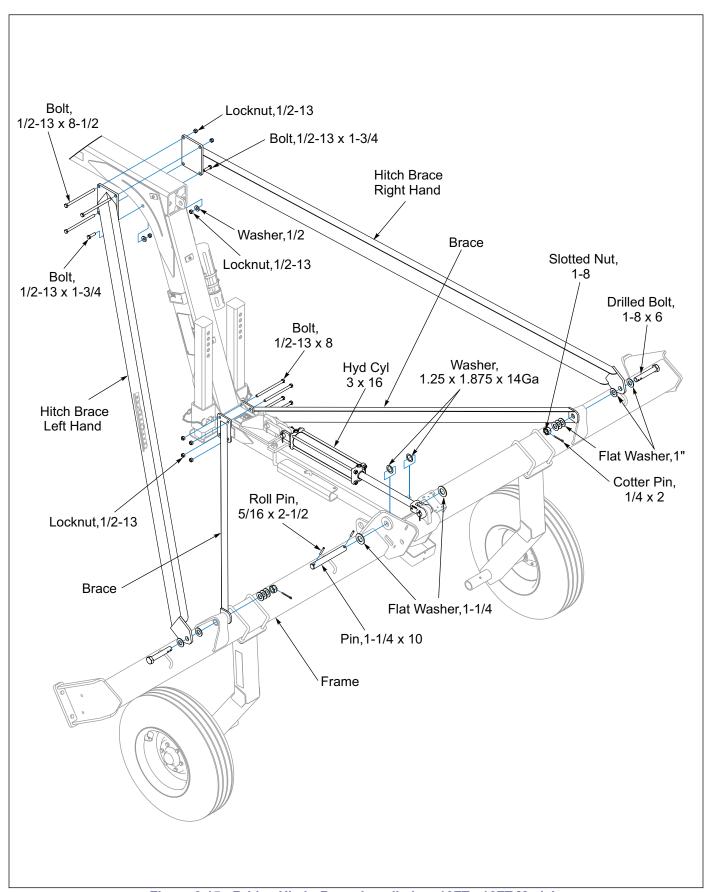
Bridge Hitch: Brace Installation, 10FT - 16FT Models
